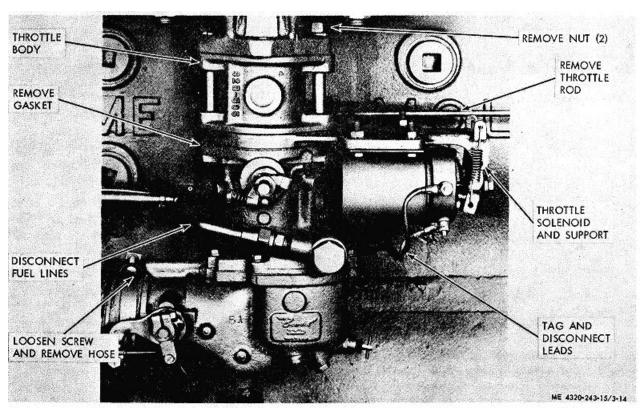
Carburetor, throttle solenoid and support and throttle body, removal and installation.
